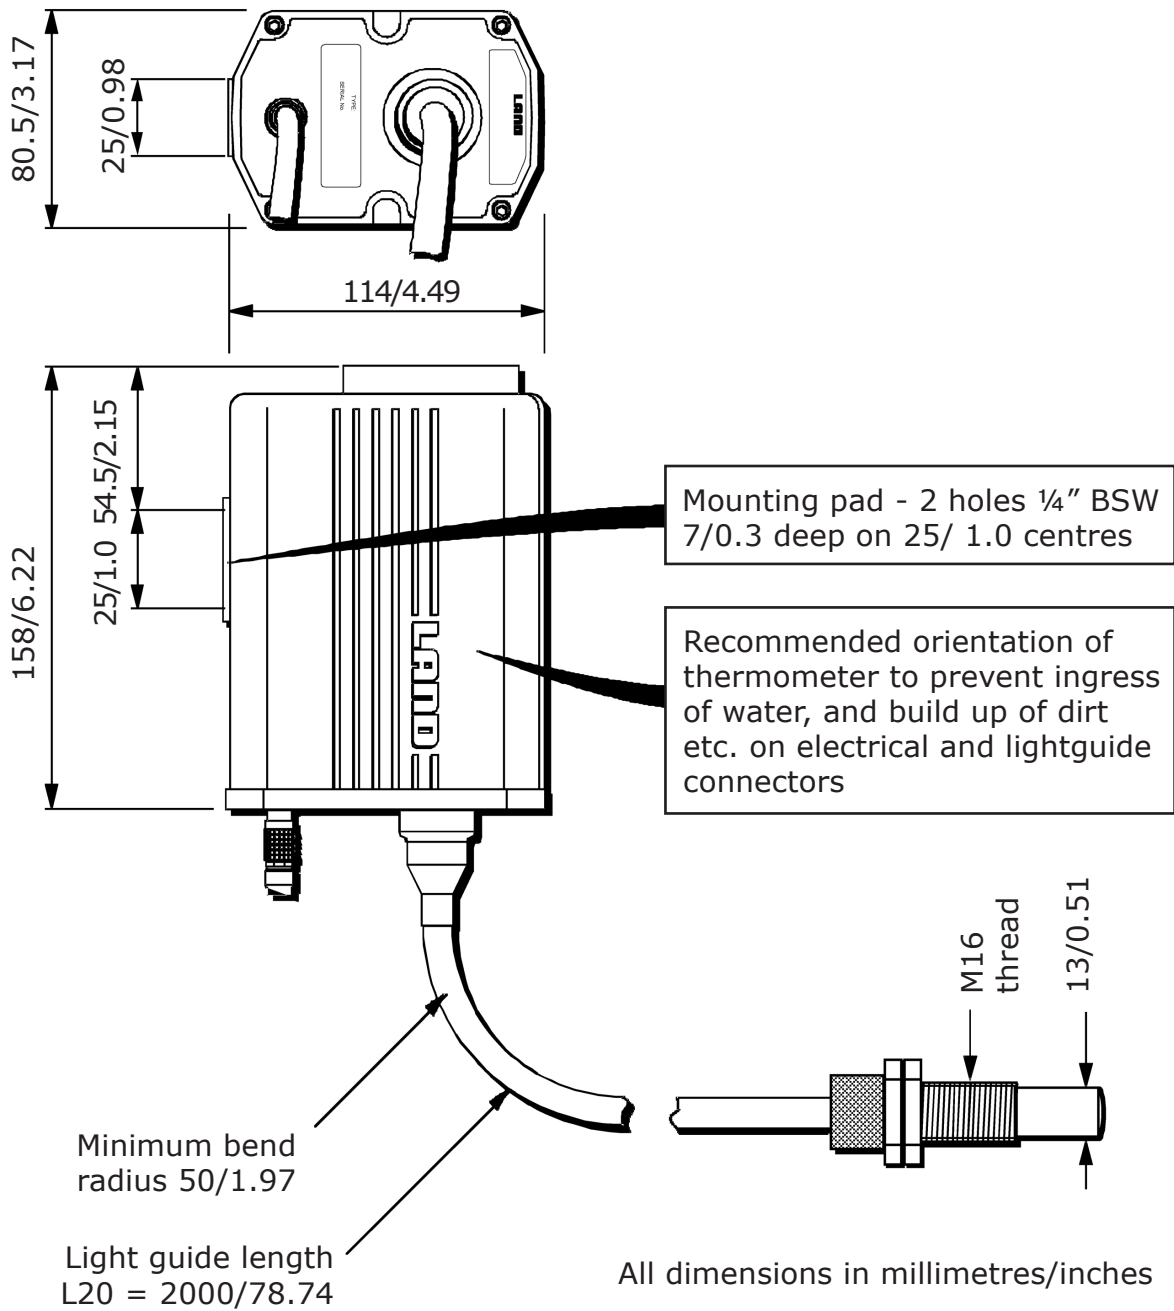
DTT Drawing Tower Thermometer Dimensions
